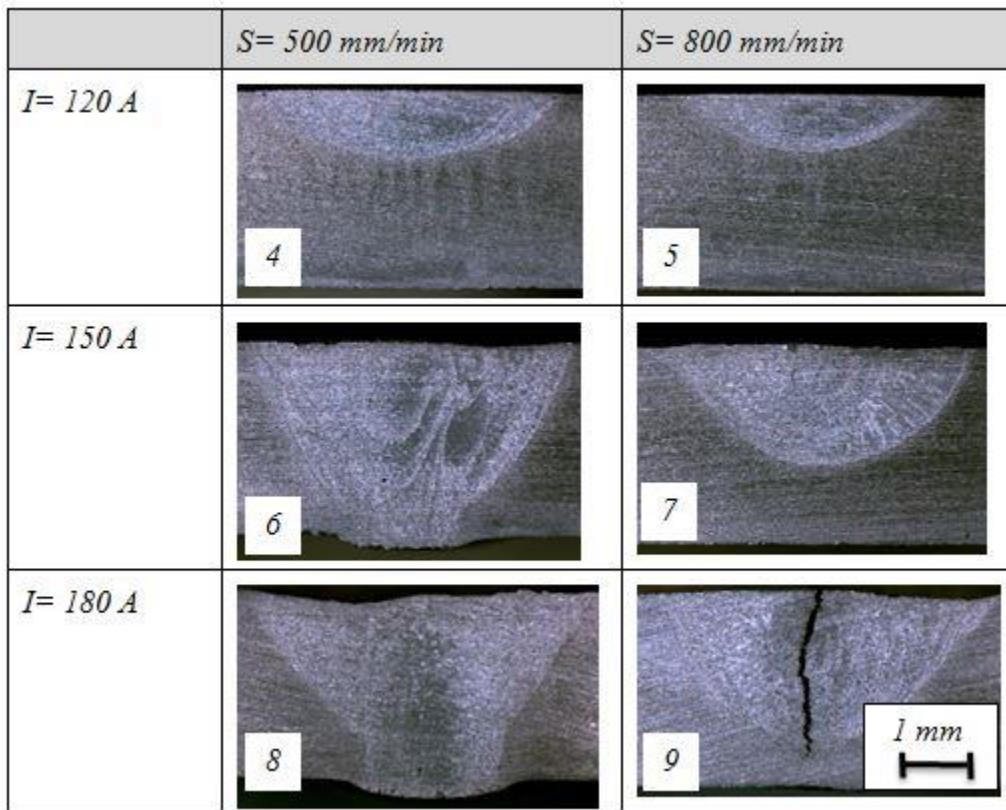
Cross section (thickness $t=3$ mm) of the hybrid laser-arc welds with low laser power ($P_L=100$ W) and different values of arc currents (I) and welding speeds (S).
